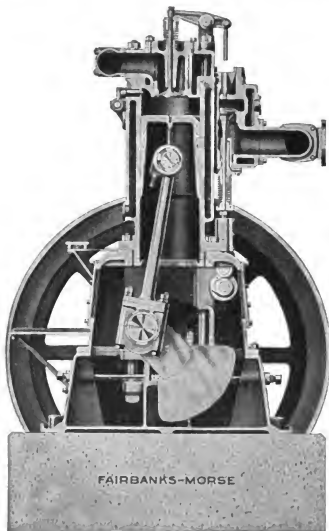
Sectional View of Multi-Cylinder Vertical Producer Gas Engine.
